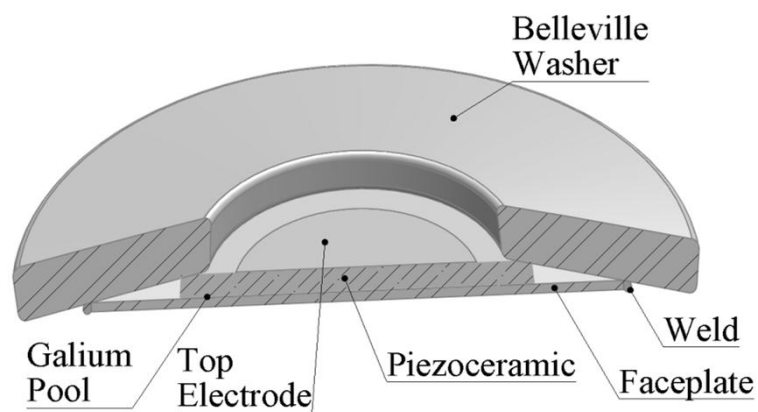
Diagram showing the cross section of the X1 faceplate assembly. The faceplate, which is made out of stainless steel 316L and the piezo-ceramic element, sandwiching the gallium pool and the silver electrode. A mild steel belleville washer welded to the substrate holds the assembly together under compression, with the hole in the washer exposing the top electrode.
